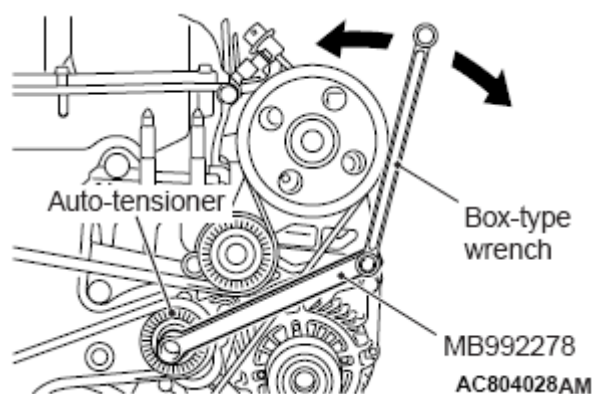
Turning Auto-Tensioner Left And Right Using Special Tool MB992278 And Box-Type Wrench
